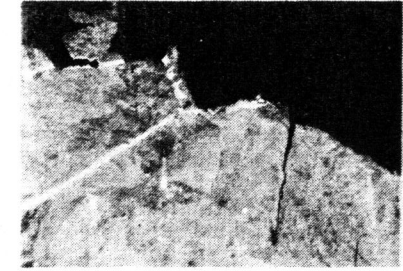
magn. 200 X. Section of the tensile fracture of controlled forged rod. Intergranular and transgranular crack propagation.
